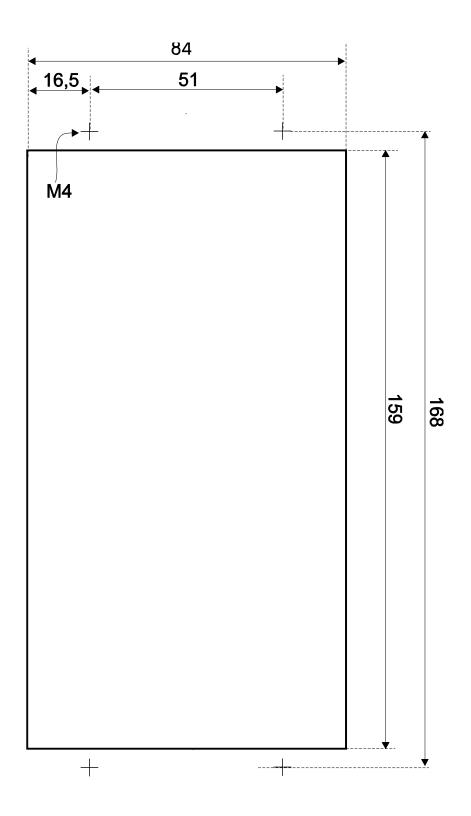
AQ 110 dimensions in millimeters (side view)
